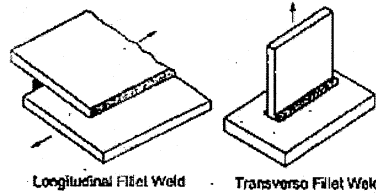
Longitudinal and transverse fillet weld
